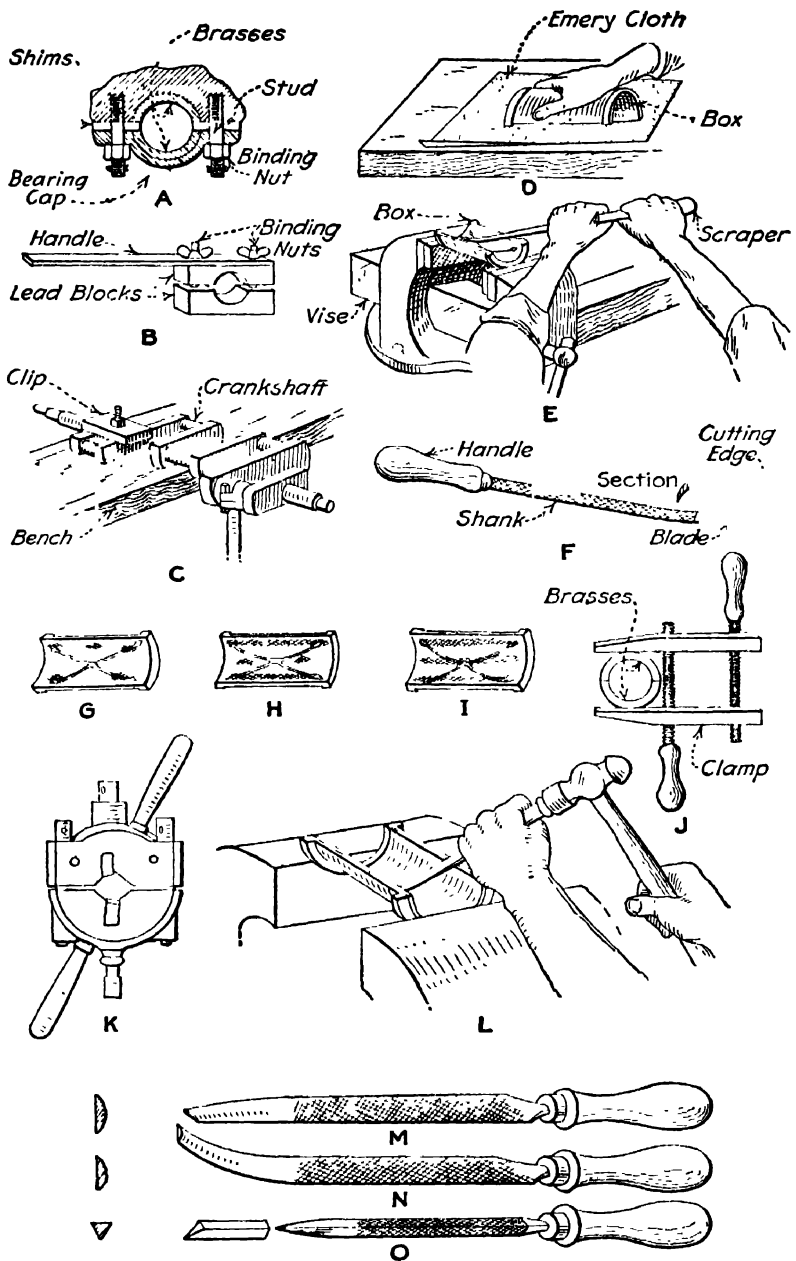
Tools and Processes Used in Refitting Engine Bearings.
